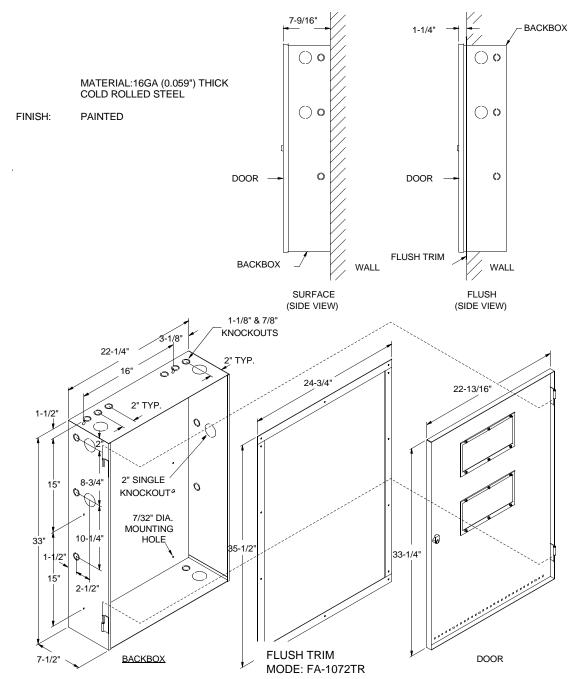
BB-1072 Flush or Surface Enclosure Installation and Dimensions
